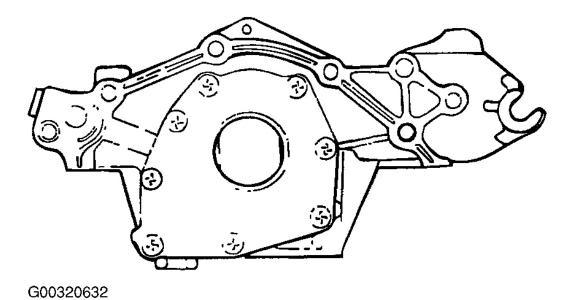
Positioning Oil Pump Case & Gasket Courtesy of KIA MOTORS AMERICA, INC.
